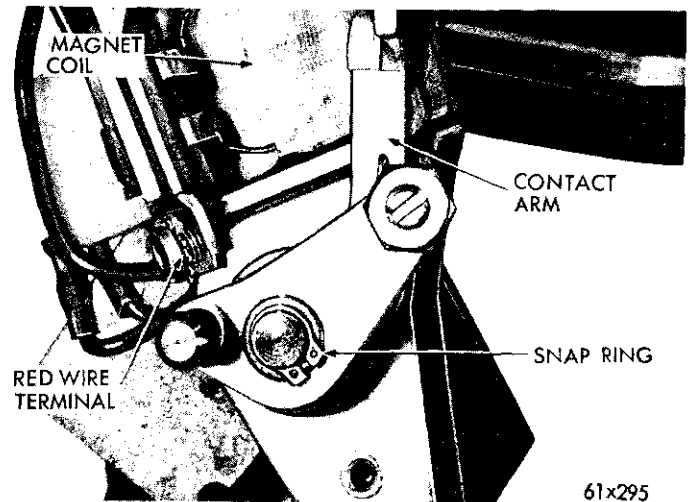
Remove Snap Ring and Contact Arm from Pintle Shaft
